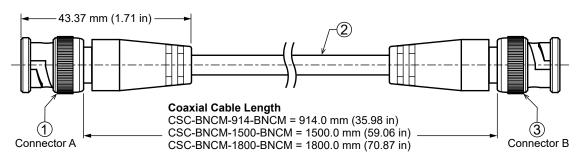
Product Dimensions for the CSC-BNCM-ccc-BNCM Cable Assembly
